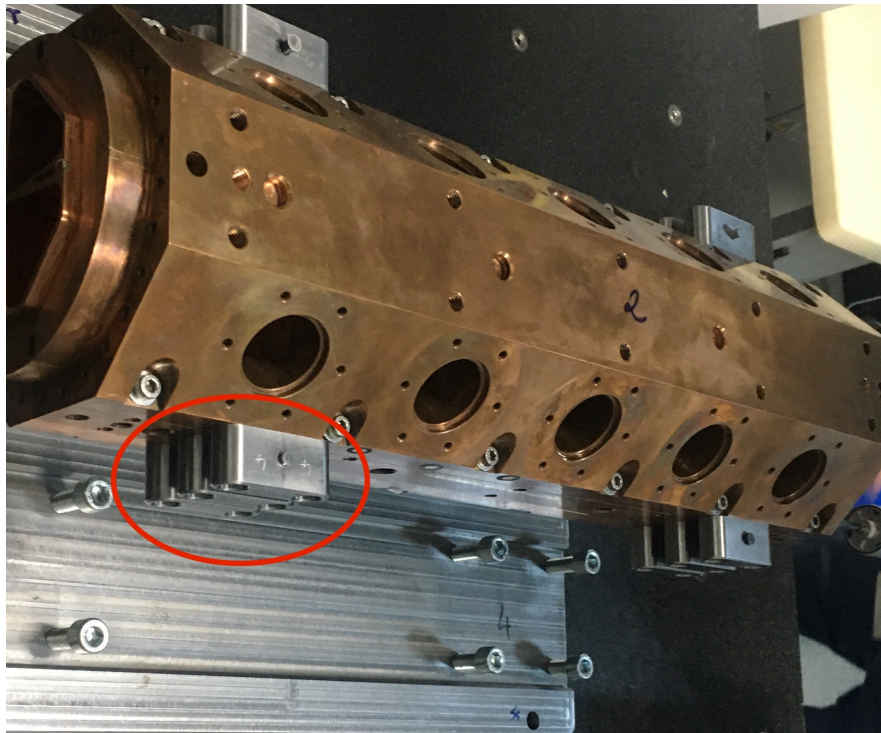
The pins and parts were added to the RFQ body to achieve repeatable relative positioning presented. These pins and holes were produced with tight tolerances, and hole positions were determined after vane alignment.
